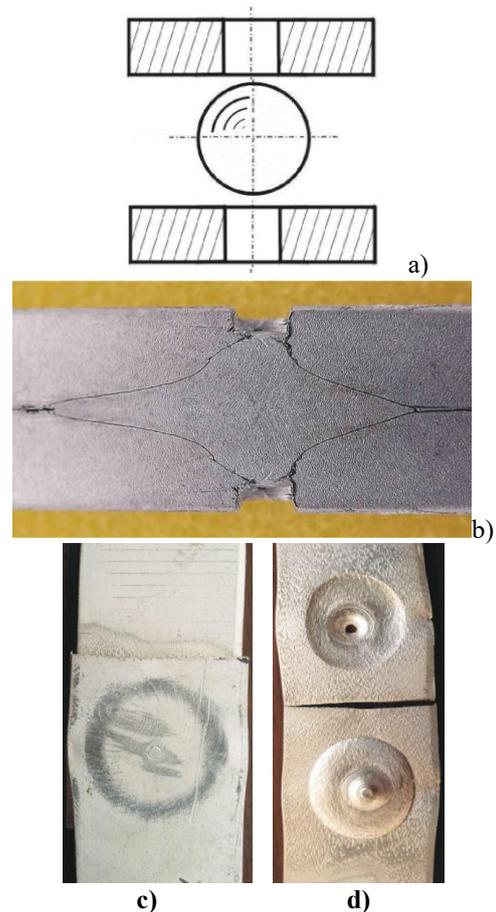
Cold welding with perforated plates and a spherical intermediate element
